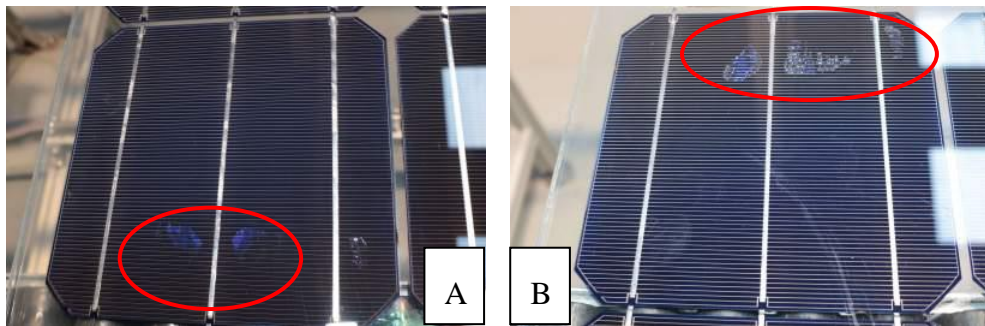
Detailed view of the Module 6.3.3.1. A) B) Red circles show defects (bubbles) found in the front of the sample.
